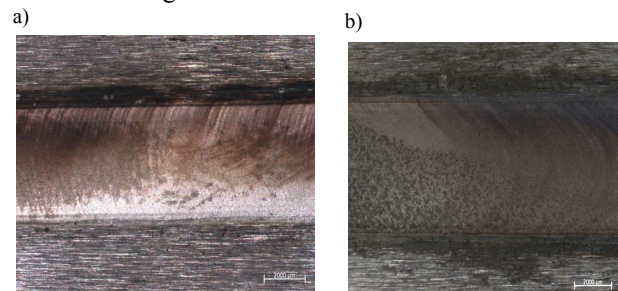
Part shape of bead face of the PMHSS6-5-3 high speed steel surface remelted with laser power values: a) 1.4 kW, b) 2.1 kW
